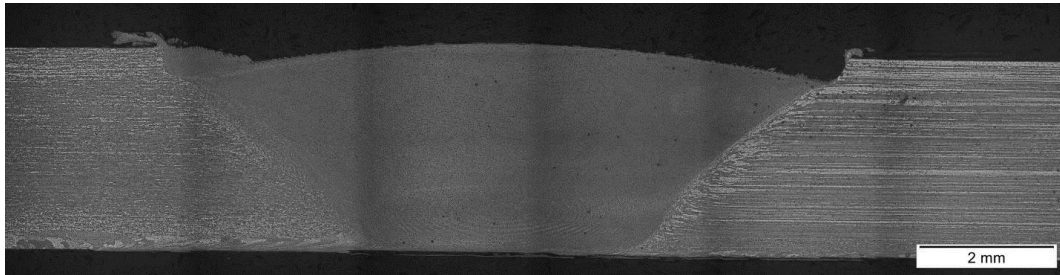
Polarised light metallographic montage showing the complete weld zone in specimen T6 tested in torsional fatigue.
